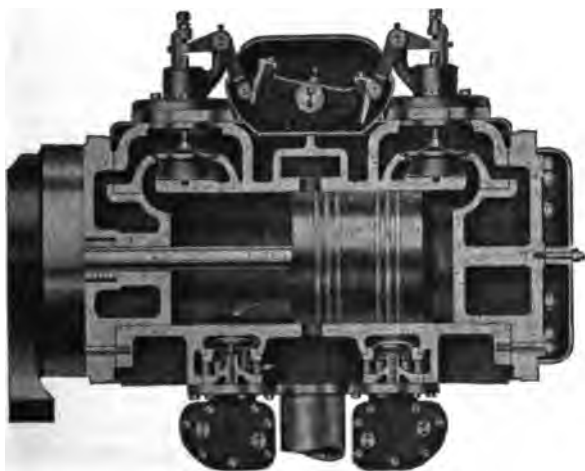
SEC. 3.—Sectional view of Skinner uniflow engine.
